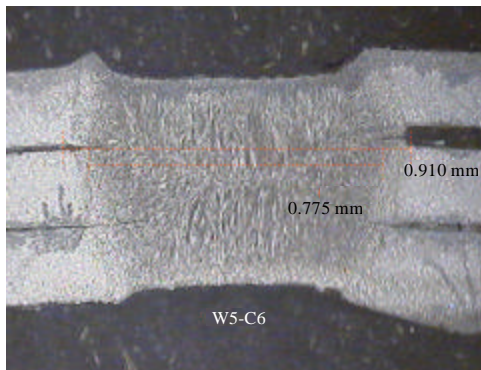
The macrograph for three sheet layers using 6.0 kA weld current (dimension measured with 5X magnification)
